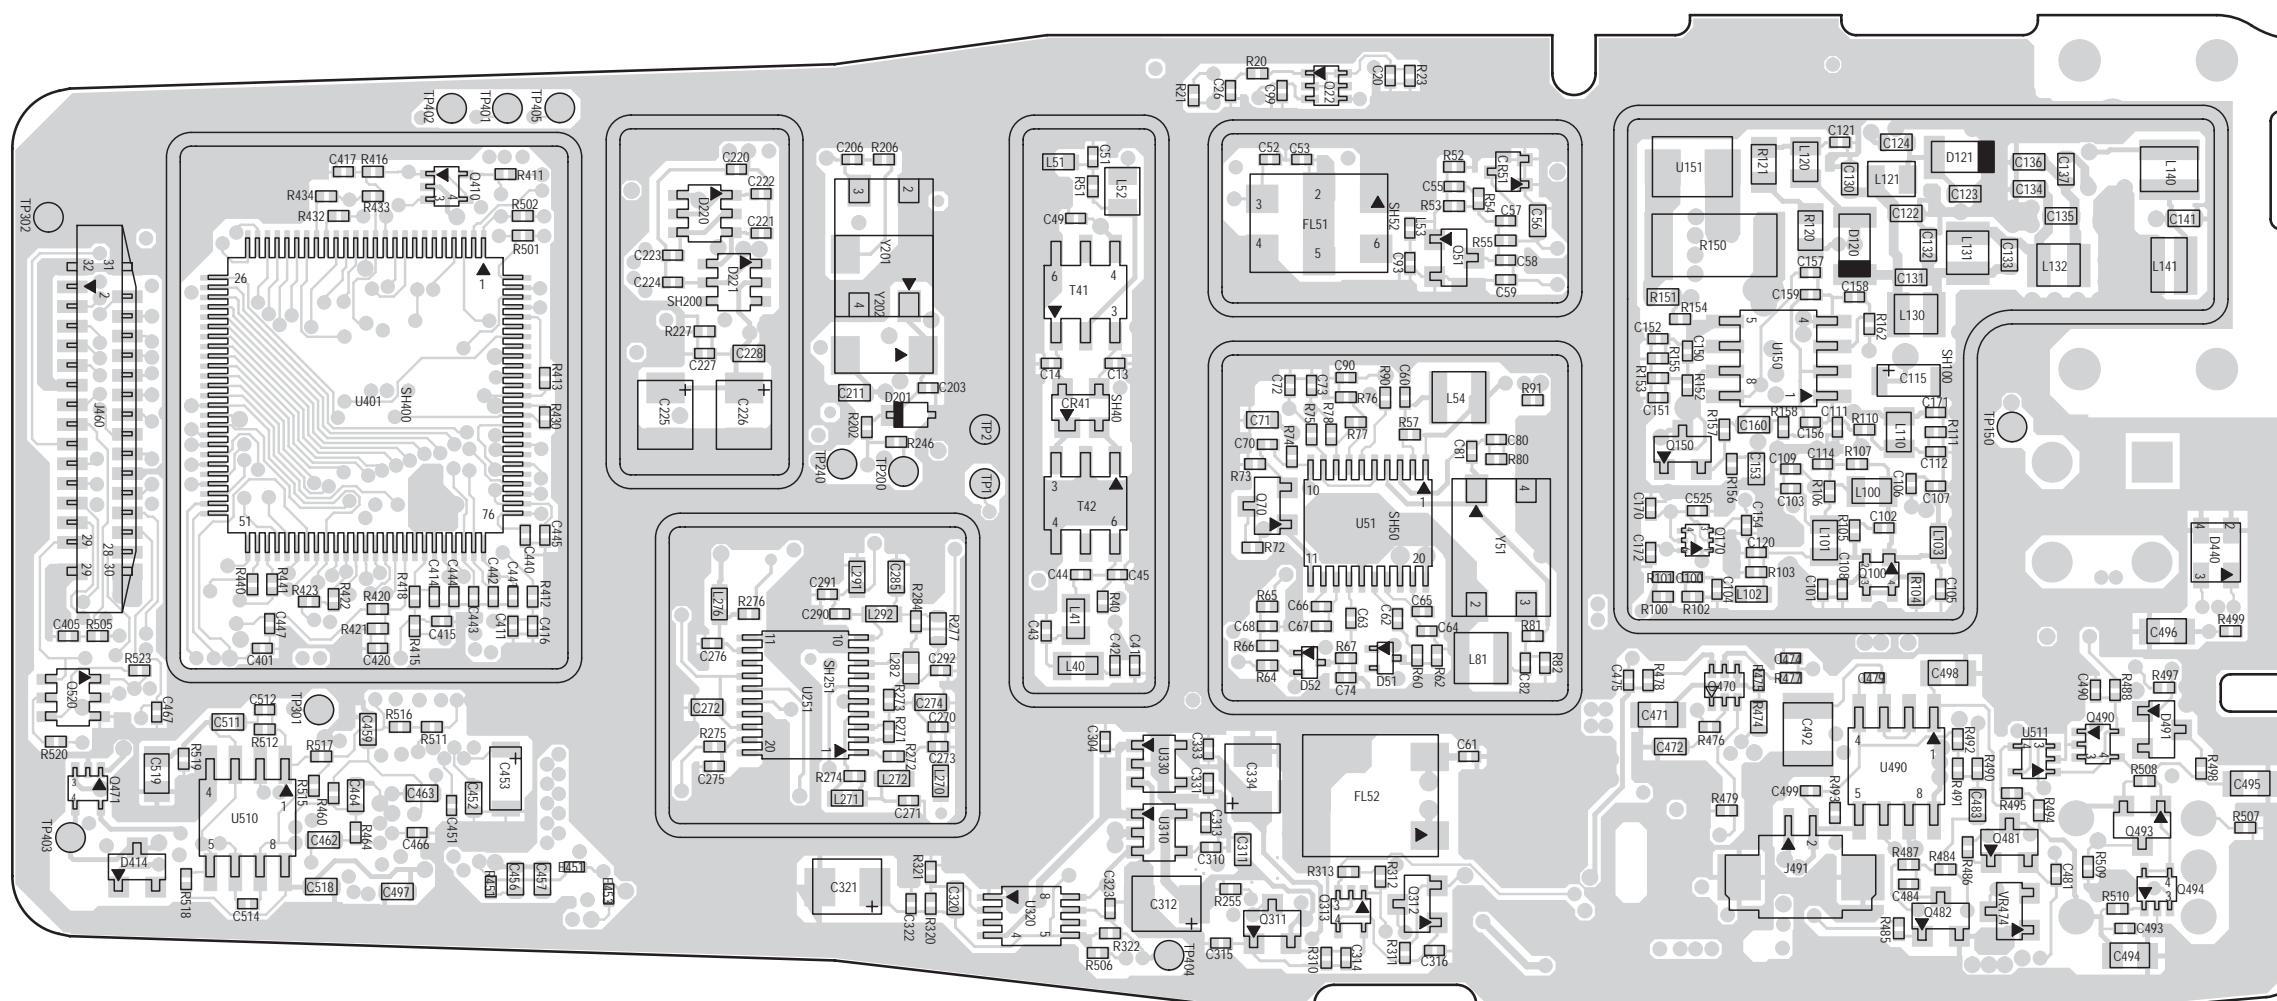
UHF (465-495 MHz) Board Solder Side View
